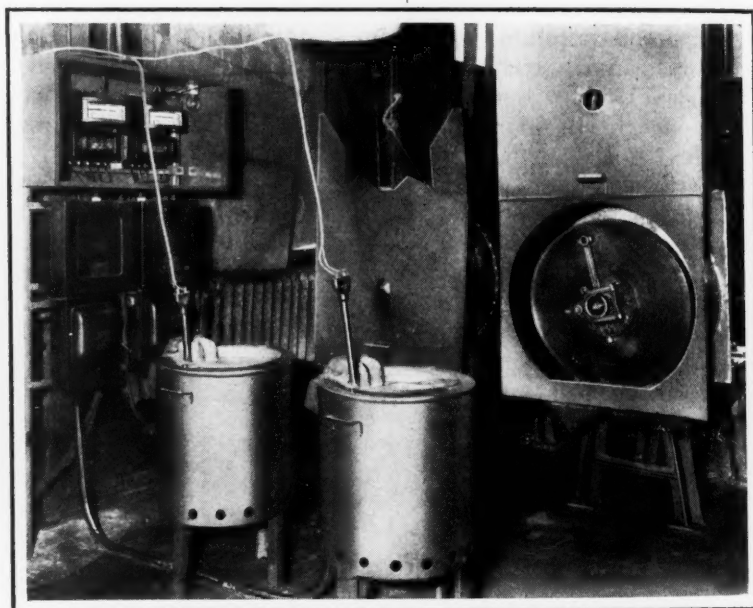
Equipment Employed in Babbitting the Crankshaft Bearing of Connecting-rods
